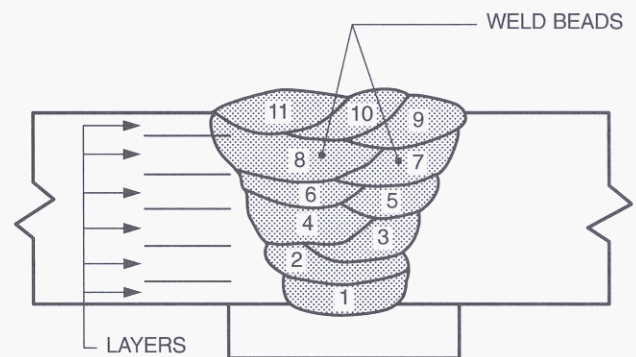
Cross-Sectional Sequence Showing Layers of Weld Metal
